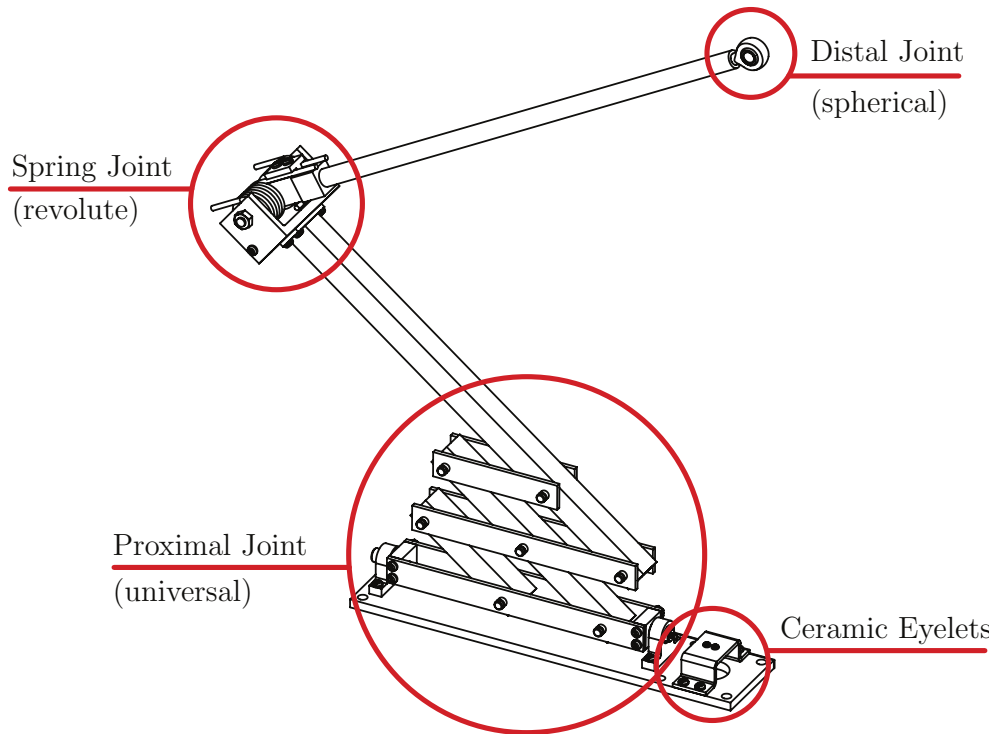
CAD drawing of the spring linkage, highlighting its primary components.
